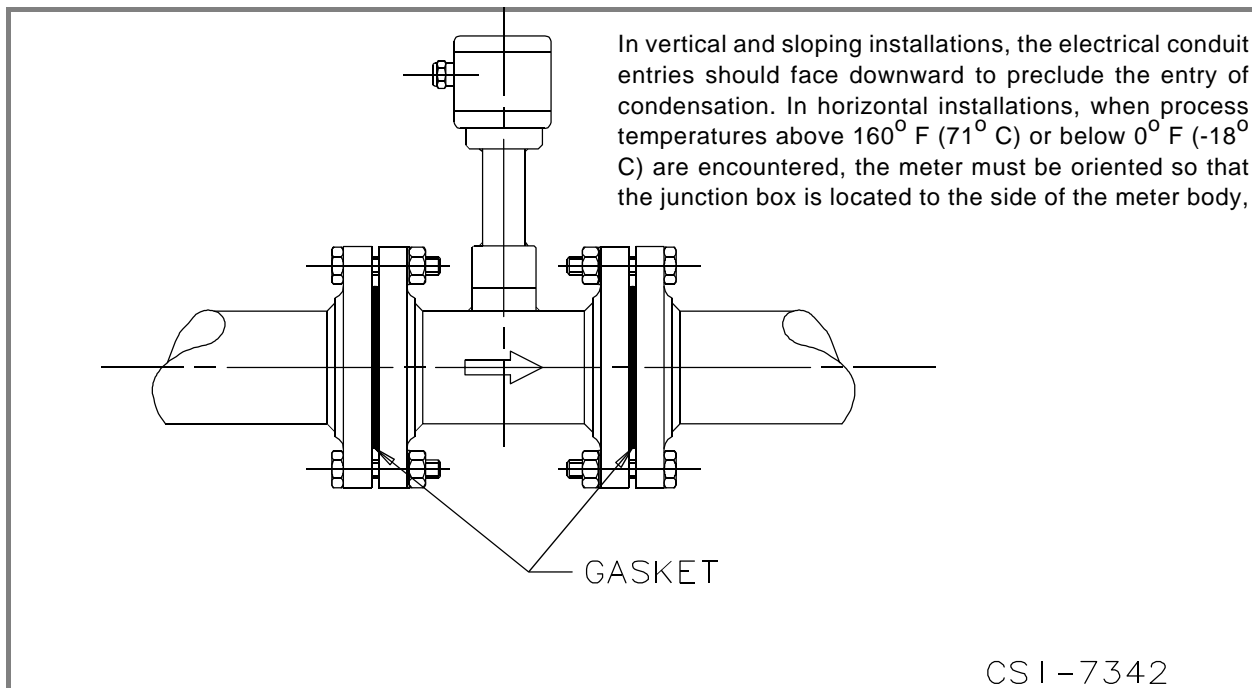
FLANGE PROCESS CONNECTIONS
